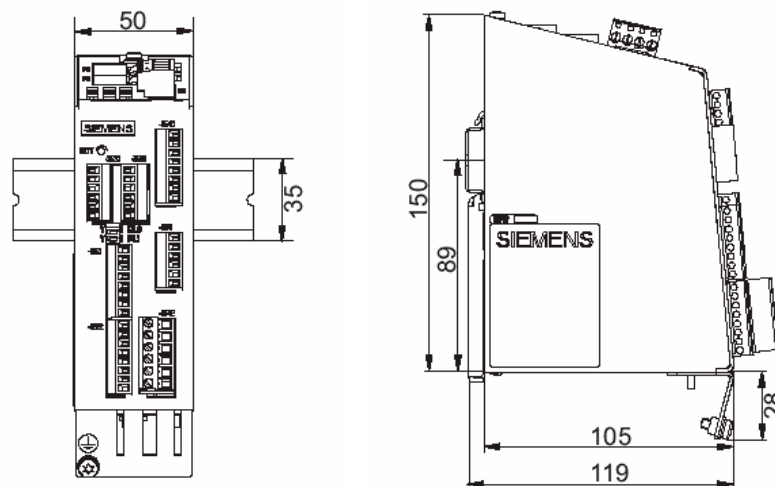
Dimension drawing: TM31 Terminal Module
